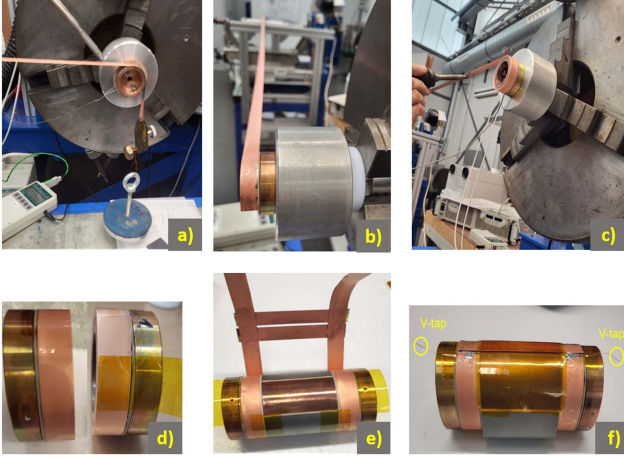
(a) Soldering the first turn of ReBCO tape on the copper body. (b) Winding of the 72 turns. (c) Last turn soldering. (d) Wound pancake coils. (e) Soldered HTS bridge tapes. (f) Magnet demonstrator.
